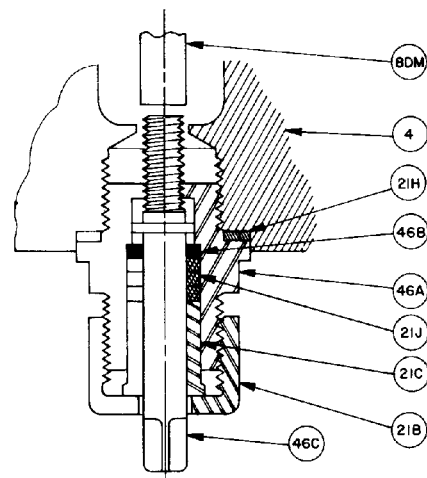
(STUFFING BOX FOR 16"-24" FITTING)
